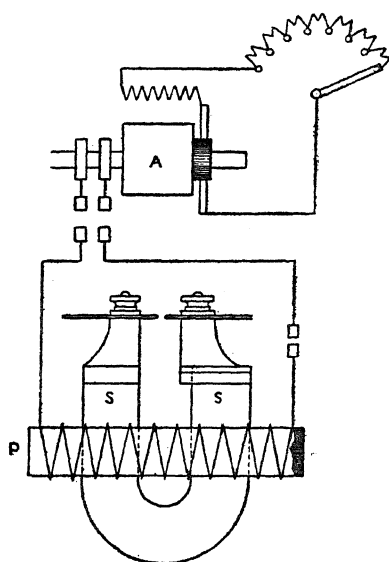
A Diagram illustrating the Construction of an Electric Welding Machine. A is an alternating current dynamo which supplies current to a primary coil of wire P wound on an iron core. This is embraced by a massive loop of copper S, and the rods to be welded form the ends of this loop. When the circuit is complete a very strong alternating current is produced in the circuit S. This heats the junction where the rods press together and welds them.
